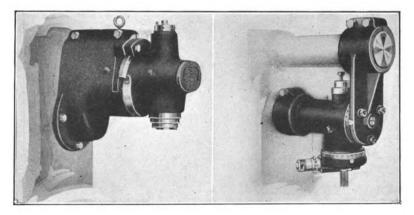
Vertical attachment. Fig. 50.—Universal milling attachment.
